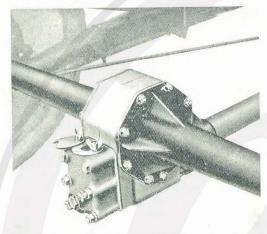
The Centre of the 11 H.P. "Standard" Back Axle This yiew shows the oil filler extension with its cover plate moved to one side.
